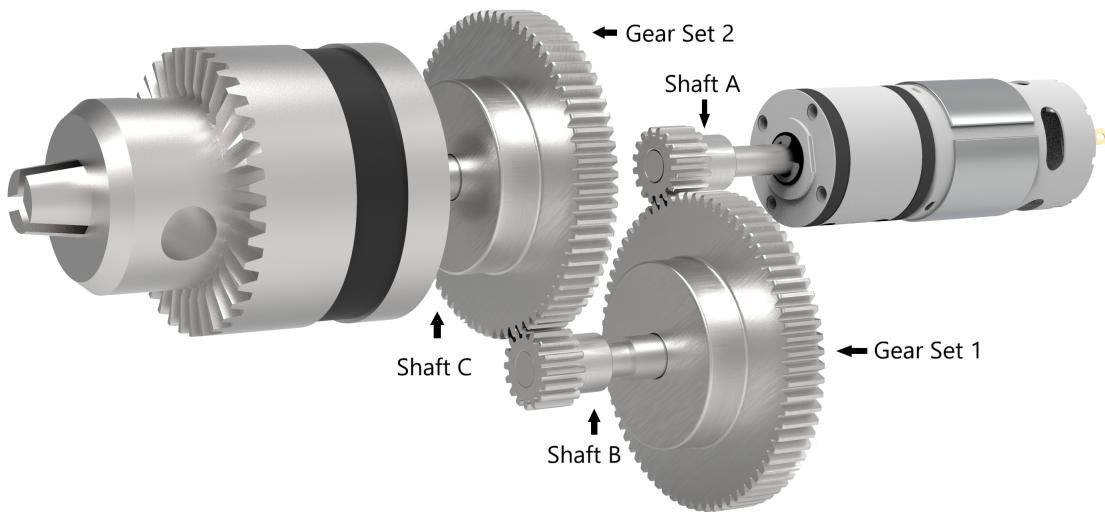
Gearbox Assembly 3D Model (Interactive if Viewed in Adobe)
